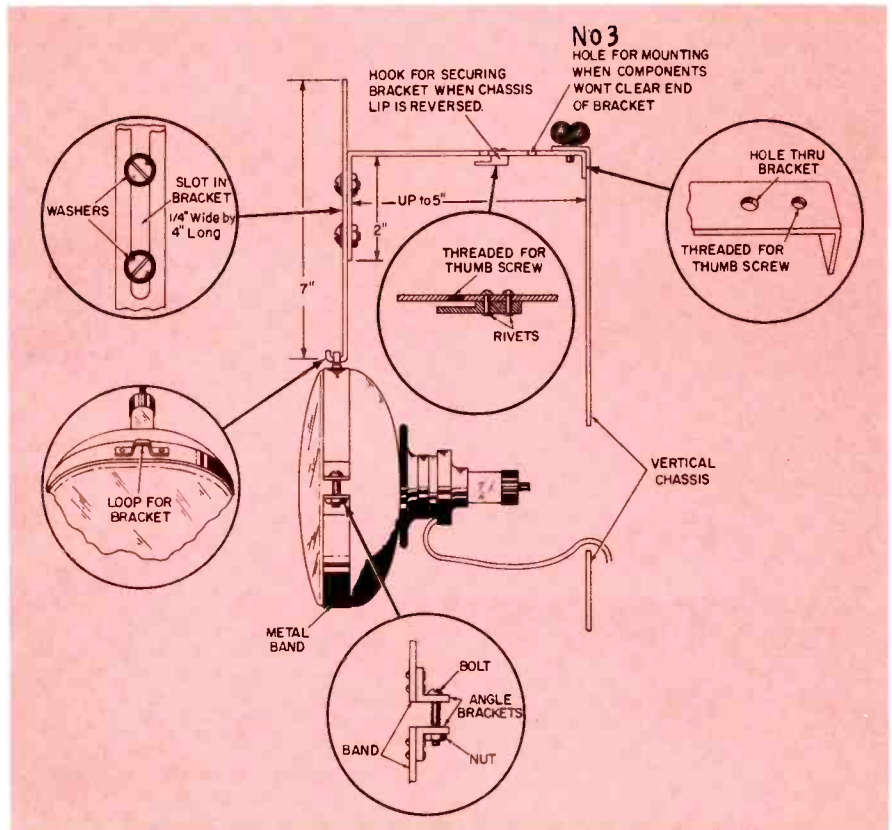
Details for 110° 8YP4 check-tube bracket show how it may be constructed and used with practically any vertical-type chassis design.
